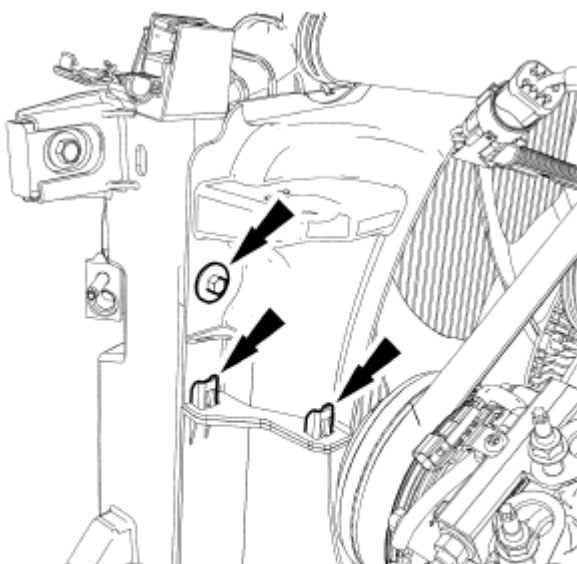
Locating Upper Fan Shroud Bolts And Clips
